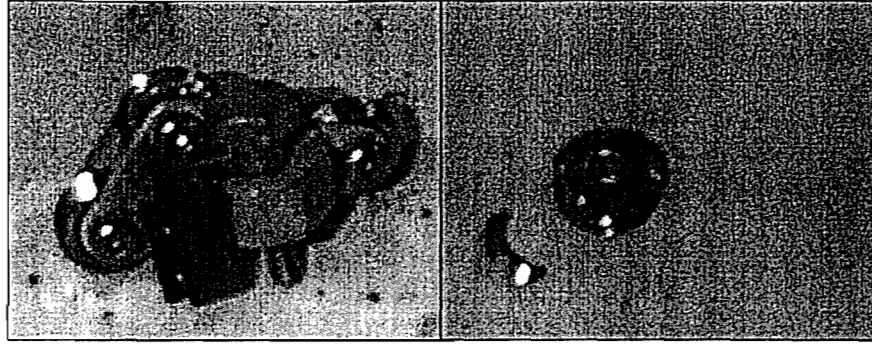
Upper V-Wheel Failure on Cart Subassembly
